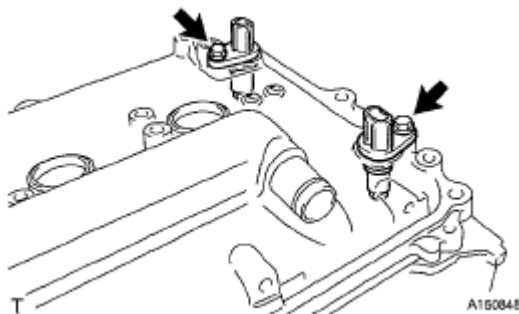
Locating No. 1 Crank Position Sensor Bolt
